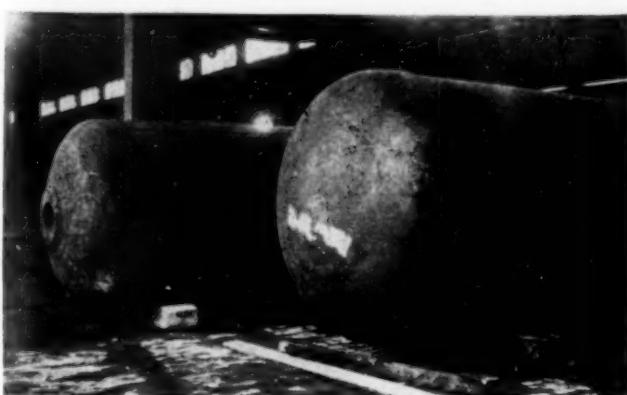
Welded Heads With and Without Manhole Ring
